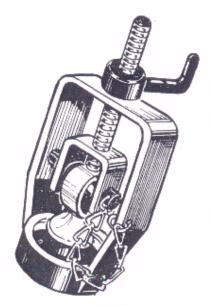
61-3503 Rear damper dismantling and assembly tool.
